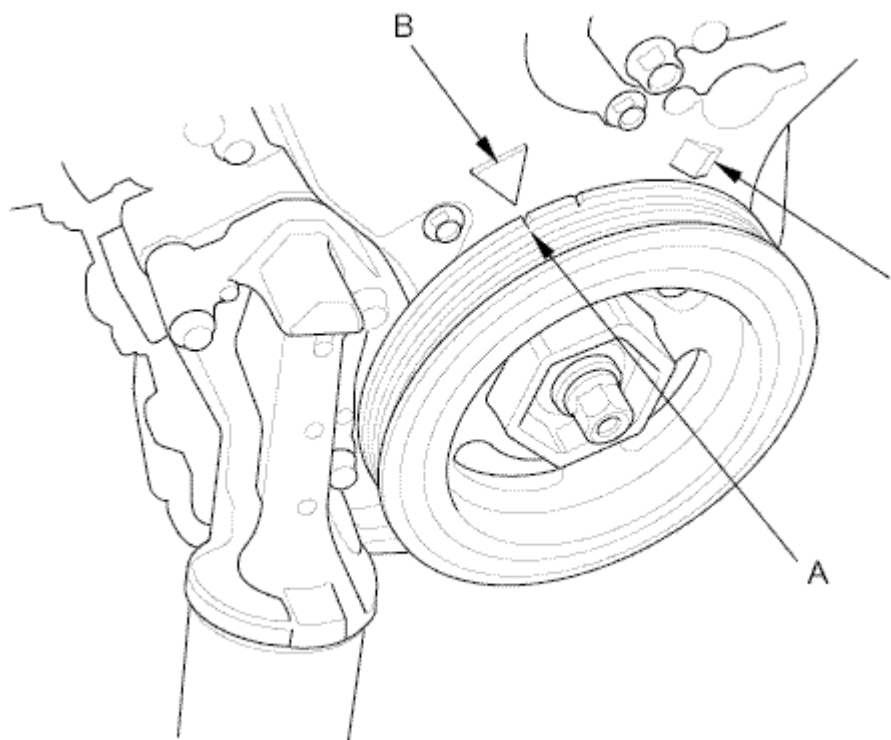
Identifying Timing Mark On Crankshaft Pulley
